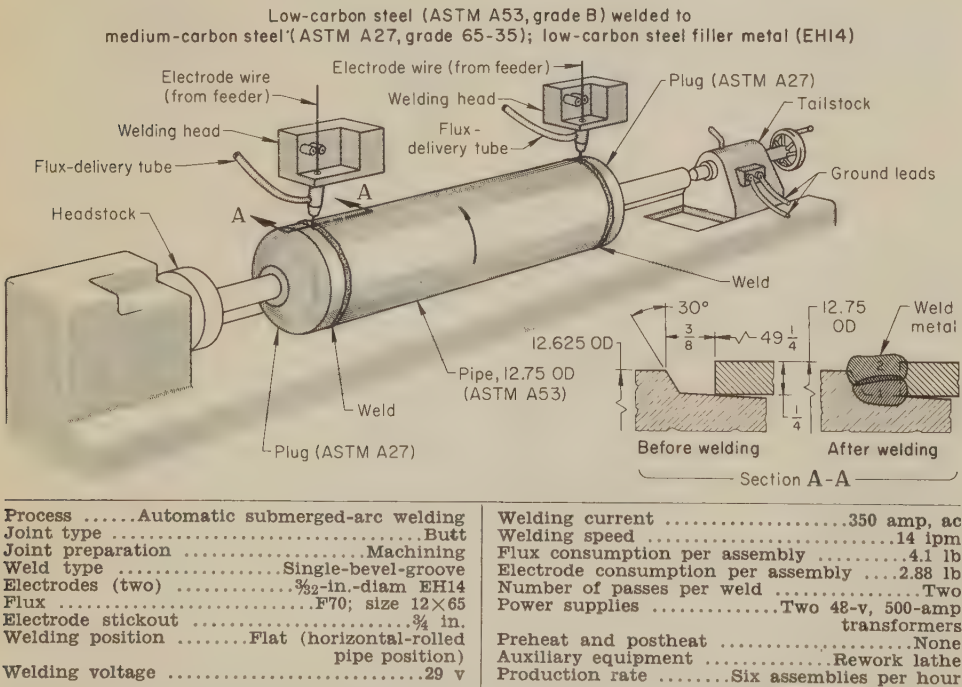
Use of a lathe fixture for support and rotation during simultaneous welding of two plugs to the ends of a pipe, in the production of a cargo cushion (Example 50)
